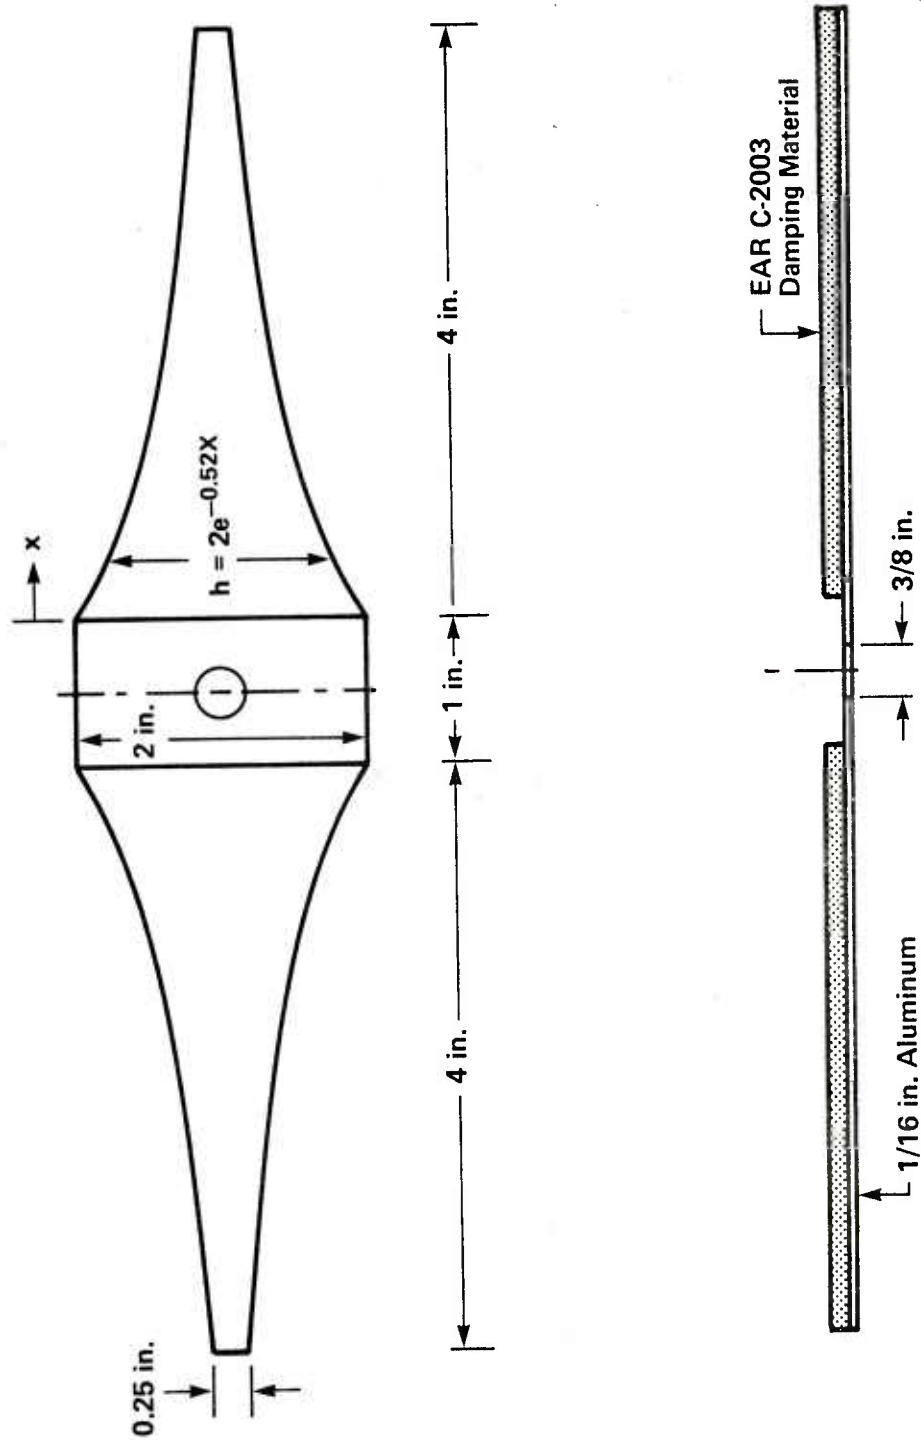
DIMENSIONS OF TAPERED EXPERIMENTAL BEAM.
